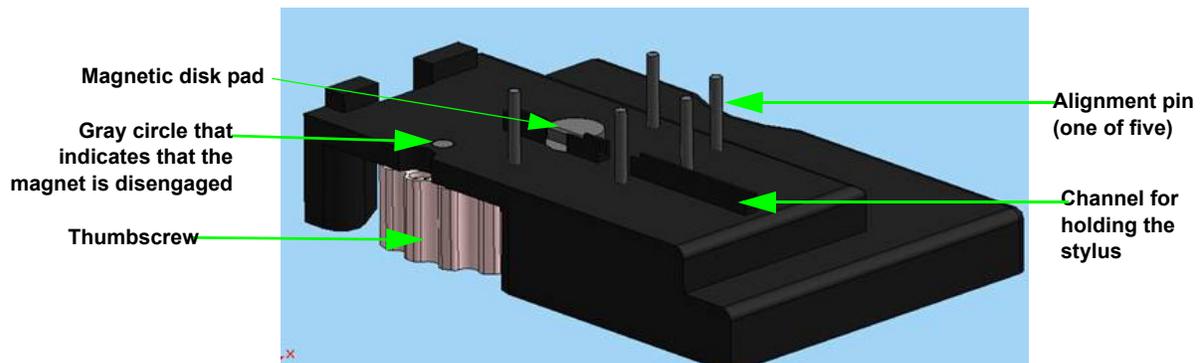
Stylus Exchange Tool with Its Magnet Disengaged
